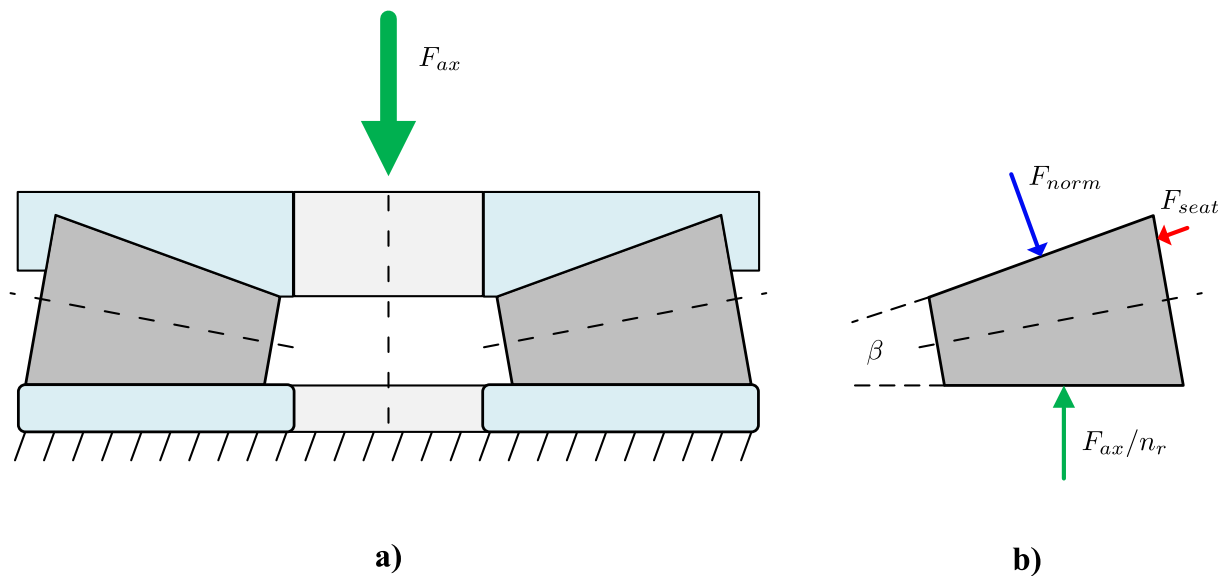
Axial tapered roller bearing forces. a) Axial tapered roller bearing with an axial load, b) Free body diagram of a single roller.
